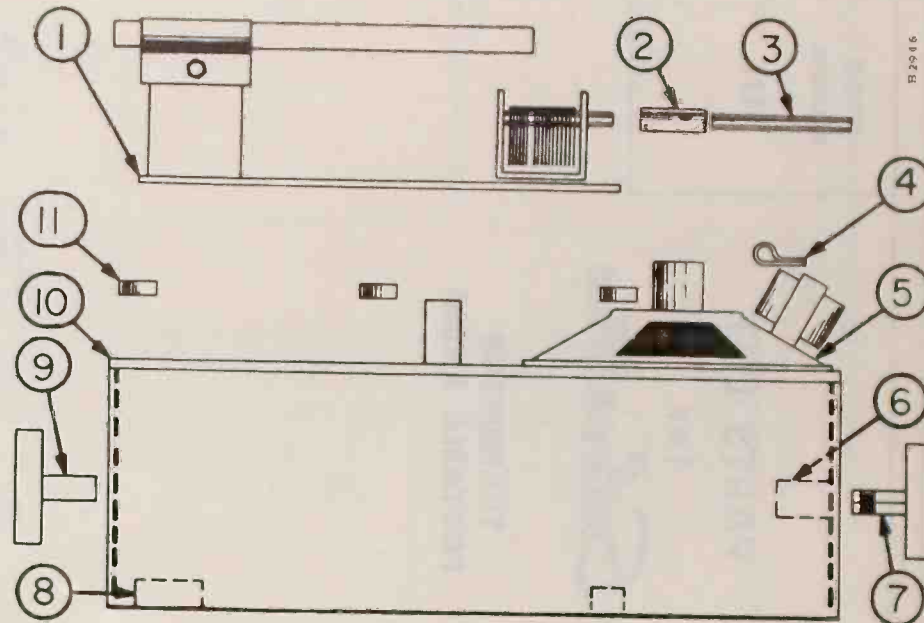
EXPLODED VIEW OF CABINET PARTS
